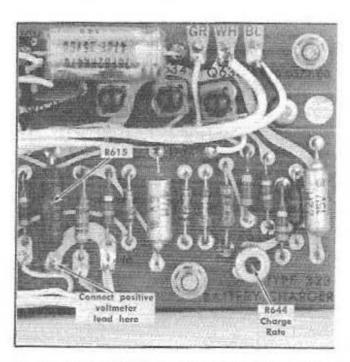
, Location of R615 and Charge Rate adjustment (Power Pack board).
